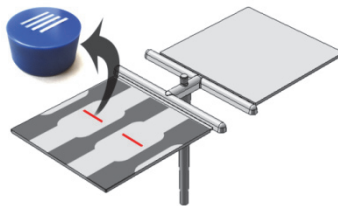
Preparation of dumbbell specimens from the injection molded plaque plates and the positions (red lines) of the cross-sections for optical microscopy
